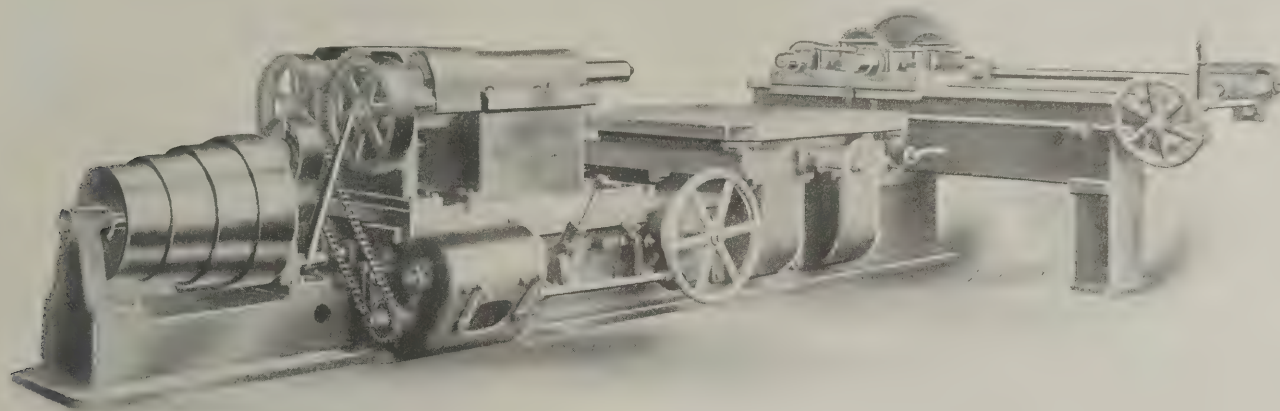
Beaman & Smith Universal Cylinder Boring and Milling Machine
